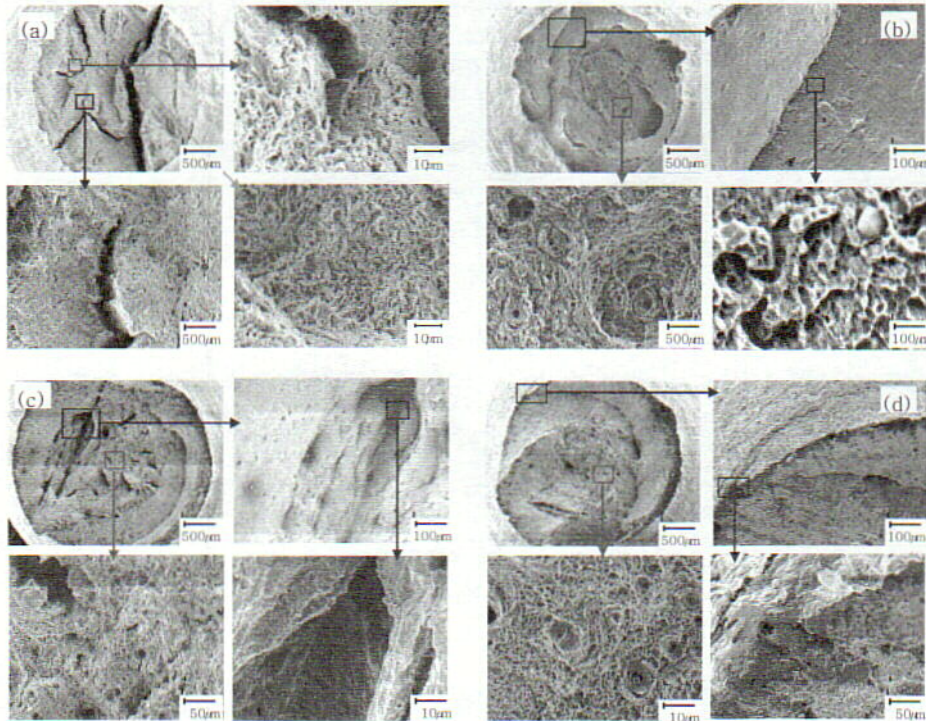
Fracture surface of tensile test. (a) WL, R.T. (b) WL, 400 °C (c) WT, R.T. (d) WT, 400 °C
